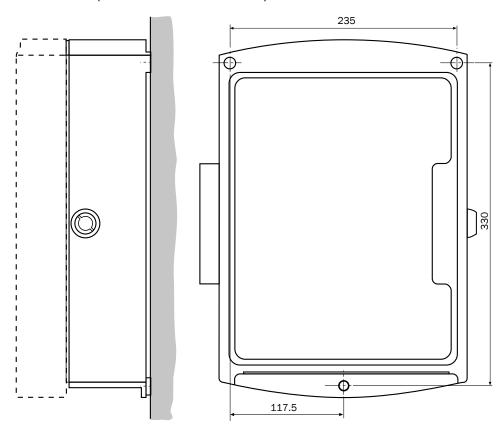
Fitting the control unit AWE, cast metal enclosure (dimensions in mm)
